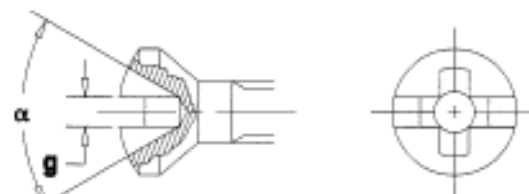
Schematic of Screw with Combined Single-Slot and Cross-Recessed Drive Connection (Table A7.3)
